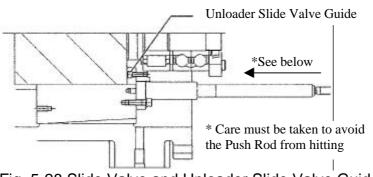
Slide Valve and Unloader Slide Valve Guide
